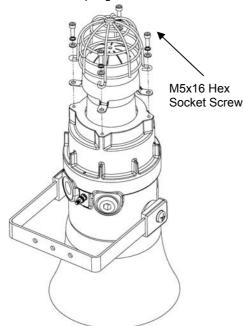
Removal of Lens Remove the guard and replace the old lens with the new lens.
